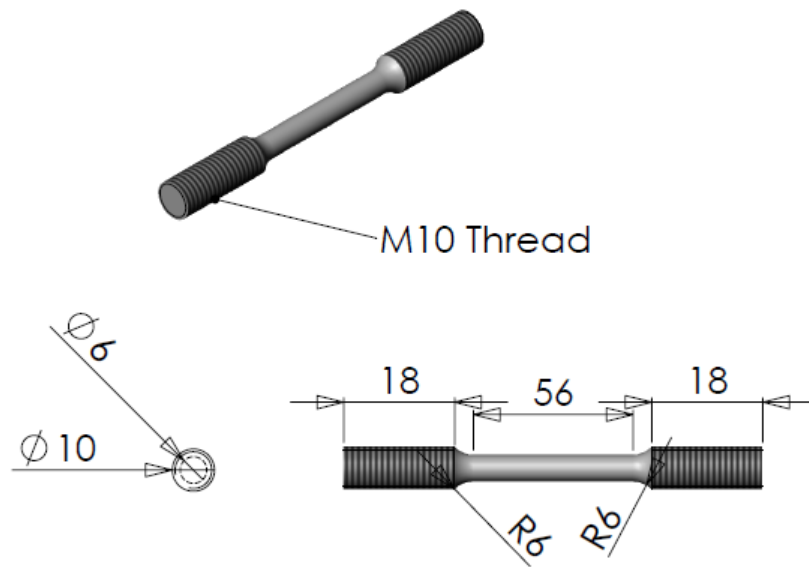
Details of the room and elevated temperature tensile test specimens.
